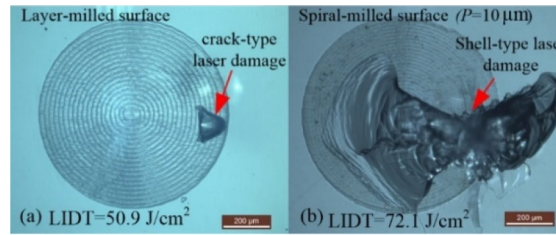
Morphologies of micro-milled KDP surfaces when laser damage took place: (a) repaired surface by the layer-milling path; (b) repaired surface by the spiral-milling path with path intervals of 10 μm . The applied laser fluences are 50.9 J/cm^2 and 72.1 J/cm^2 , respectively.
